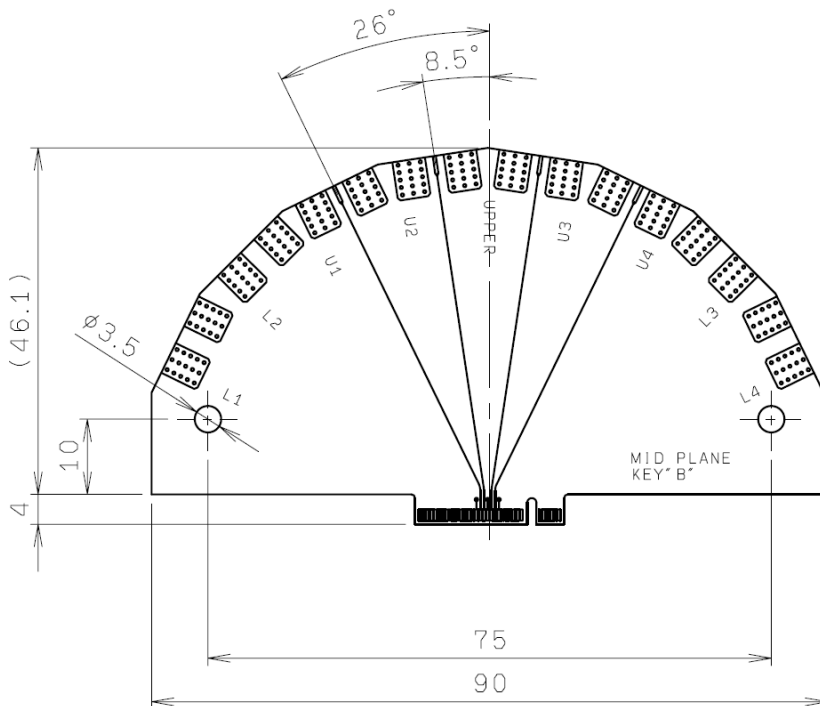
Mid-mount Module-Add-in Card Test Fixture PCB Layout
